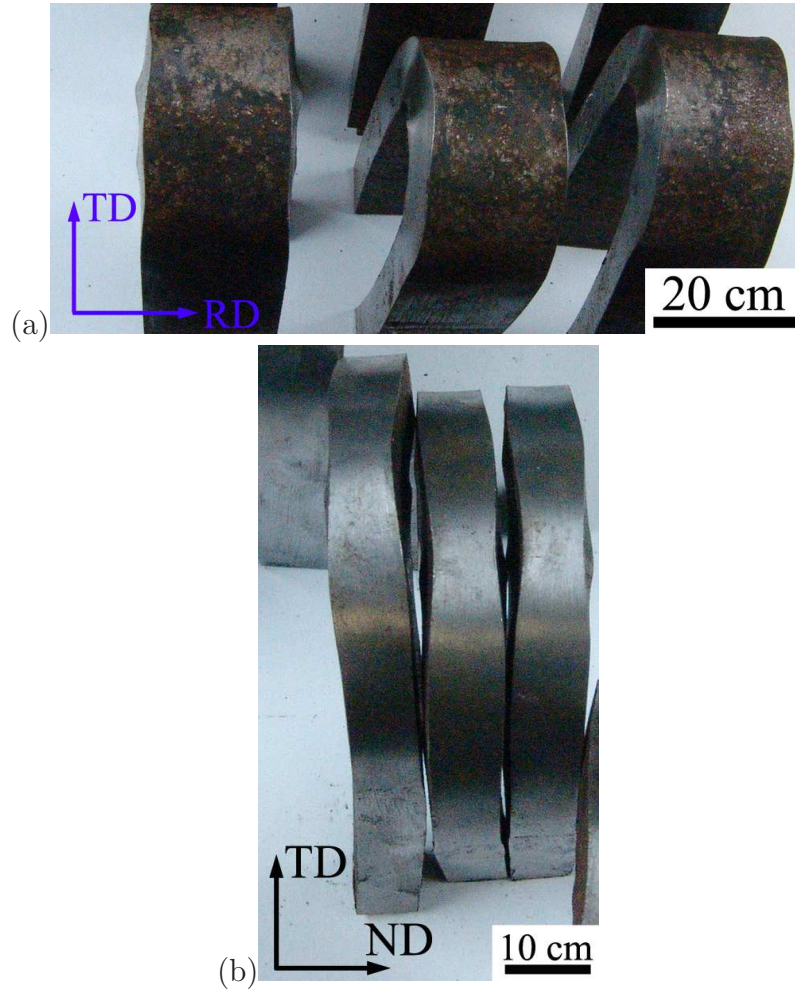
Macrographs of the heat-treated X65HIC weld segment after bend tests (a) 3 samples after face bend. (b) After side bend.
